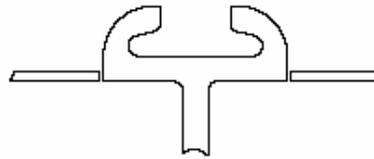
E - Schematic of Floor Deformation: Side Wall Mounted Seat
